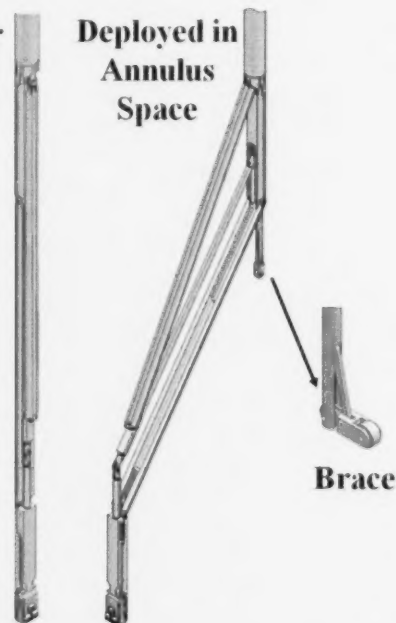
RWI tool, tool on insertion (left), tool deployed (centre), brace deployed (right).
